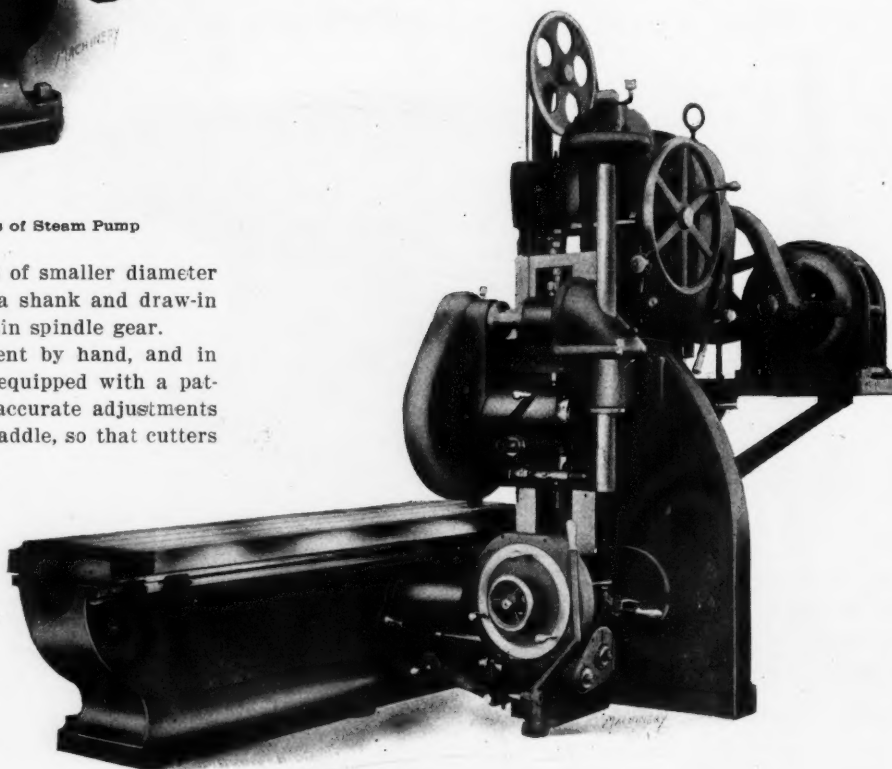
Ingersoll Open-side Horizontal-spindle Milling Machine
